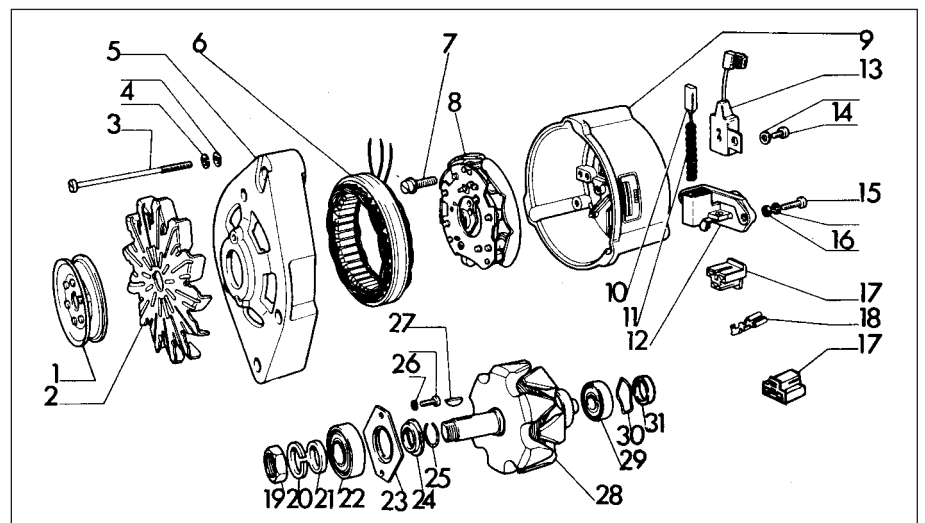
Exploded view of typical alternator (Sec 5)
